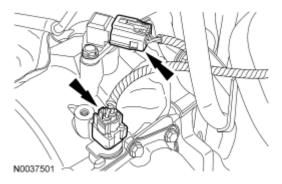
Locating Engine Wiring Harness Bracket And Nut Courtesy of FORD MOTOR CO.
